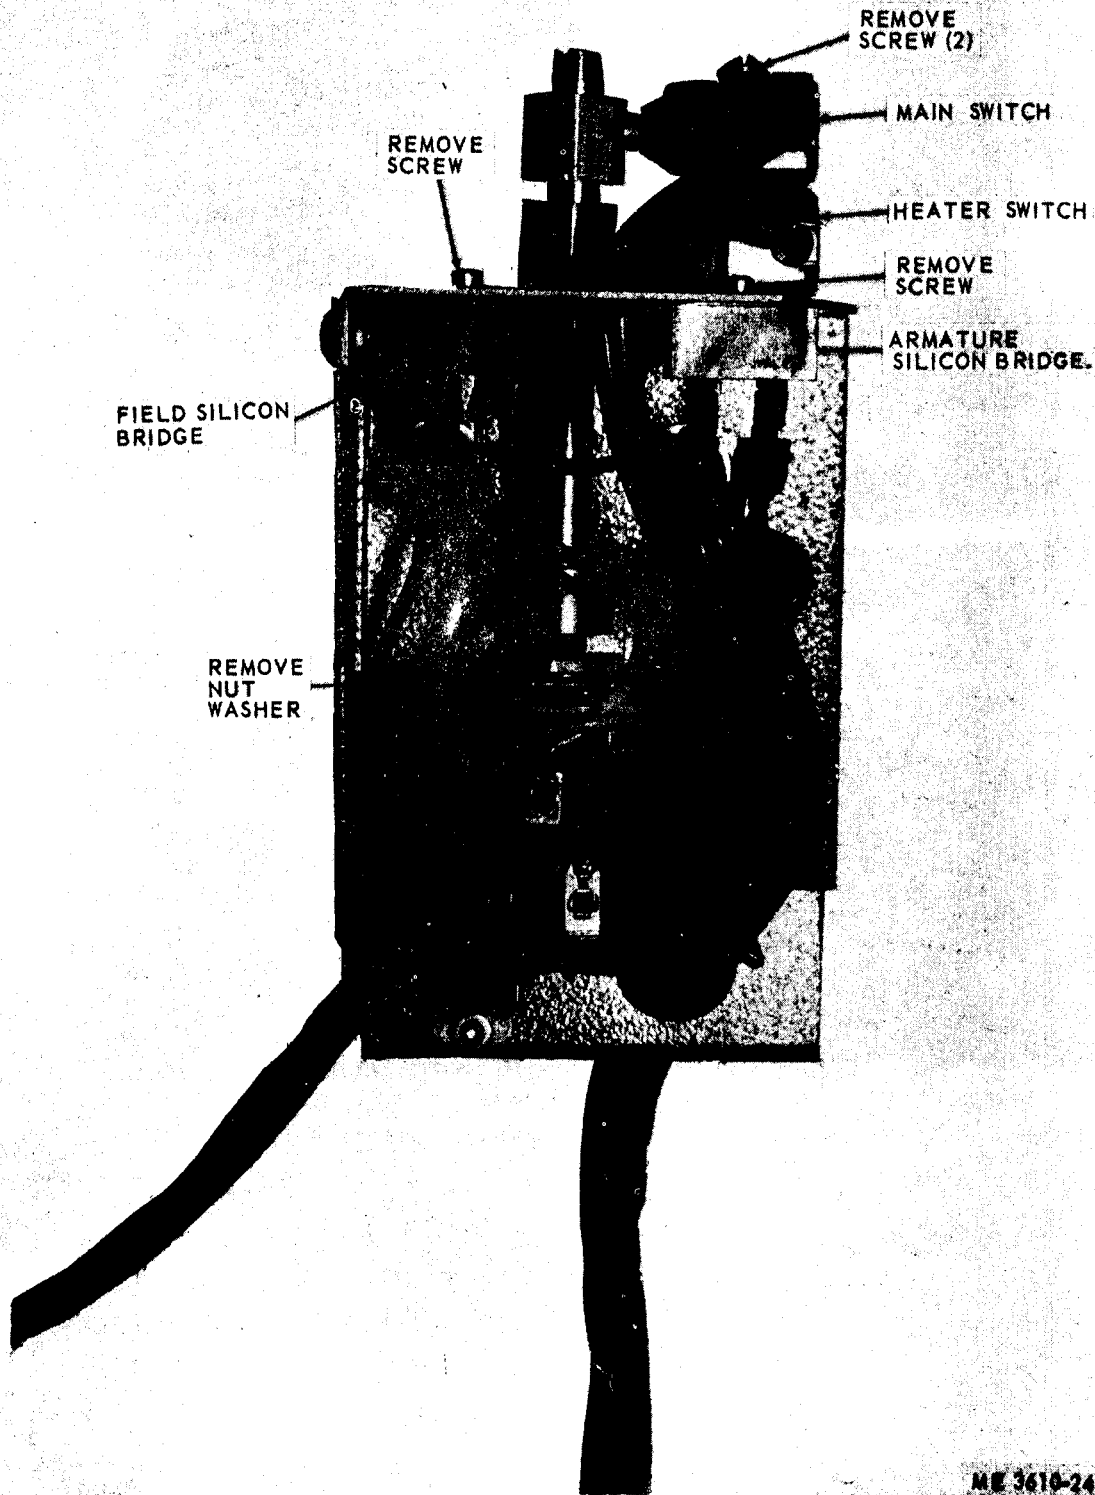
Speed control assembly removal and installation. (sheet 2 of 4).
